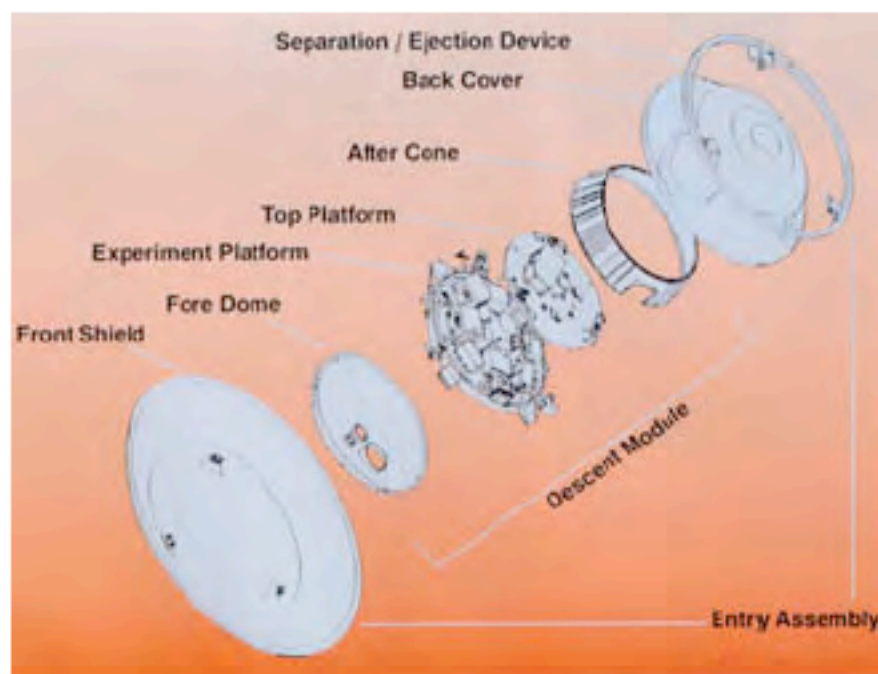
Exploded view of the Huygens Probe. It weighs 319 kg
